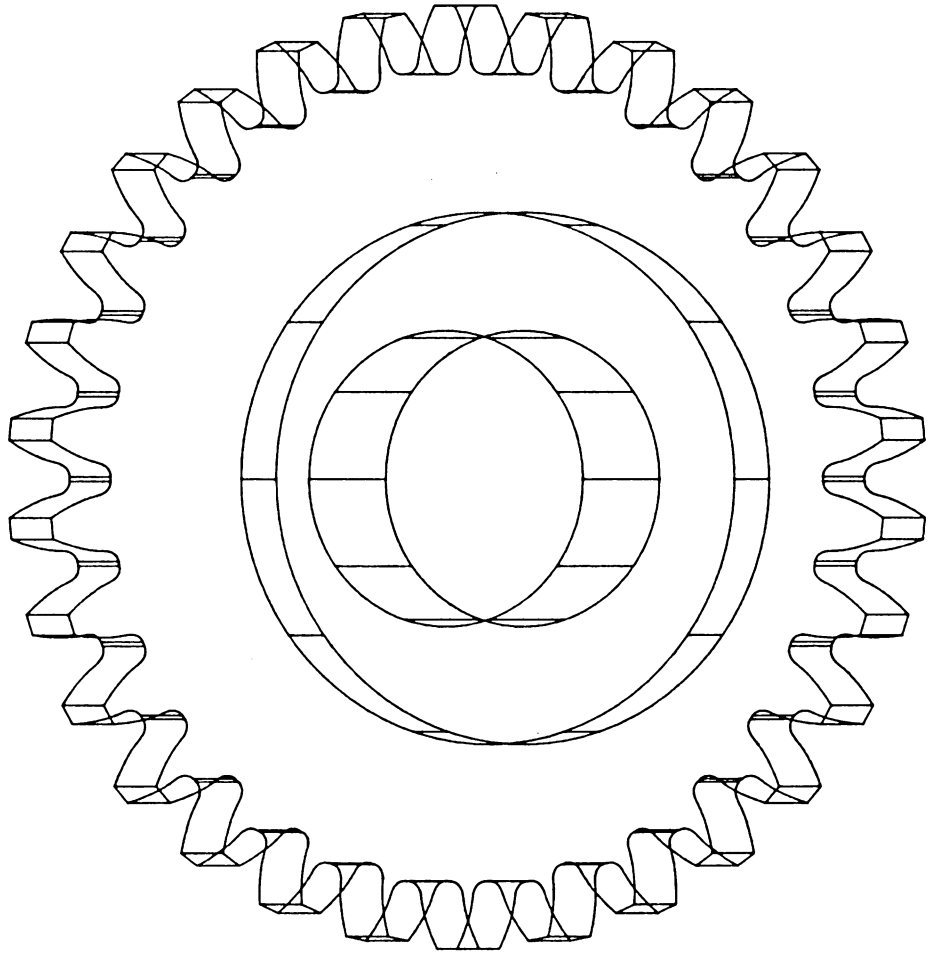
A 30 Tooth Gear with a Hub on One Side - CADAM
